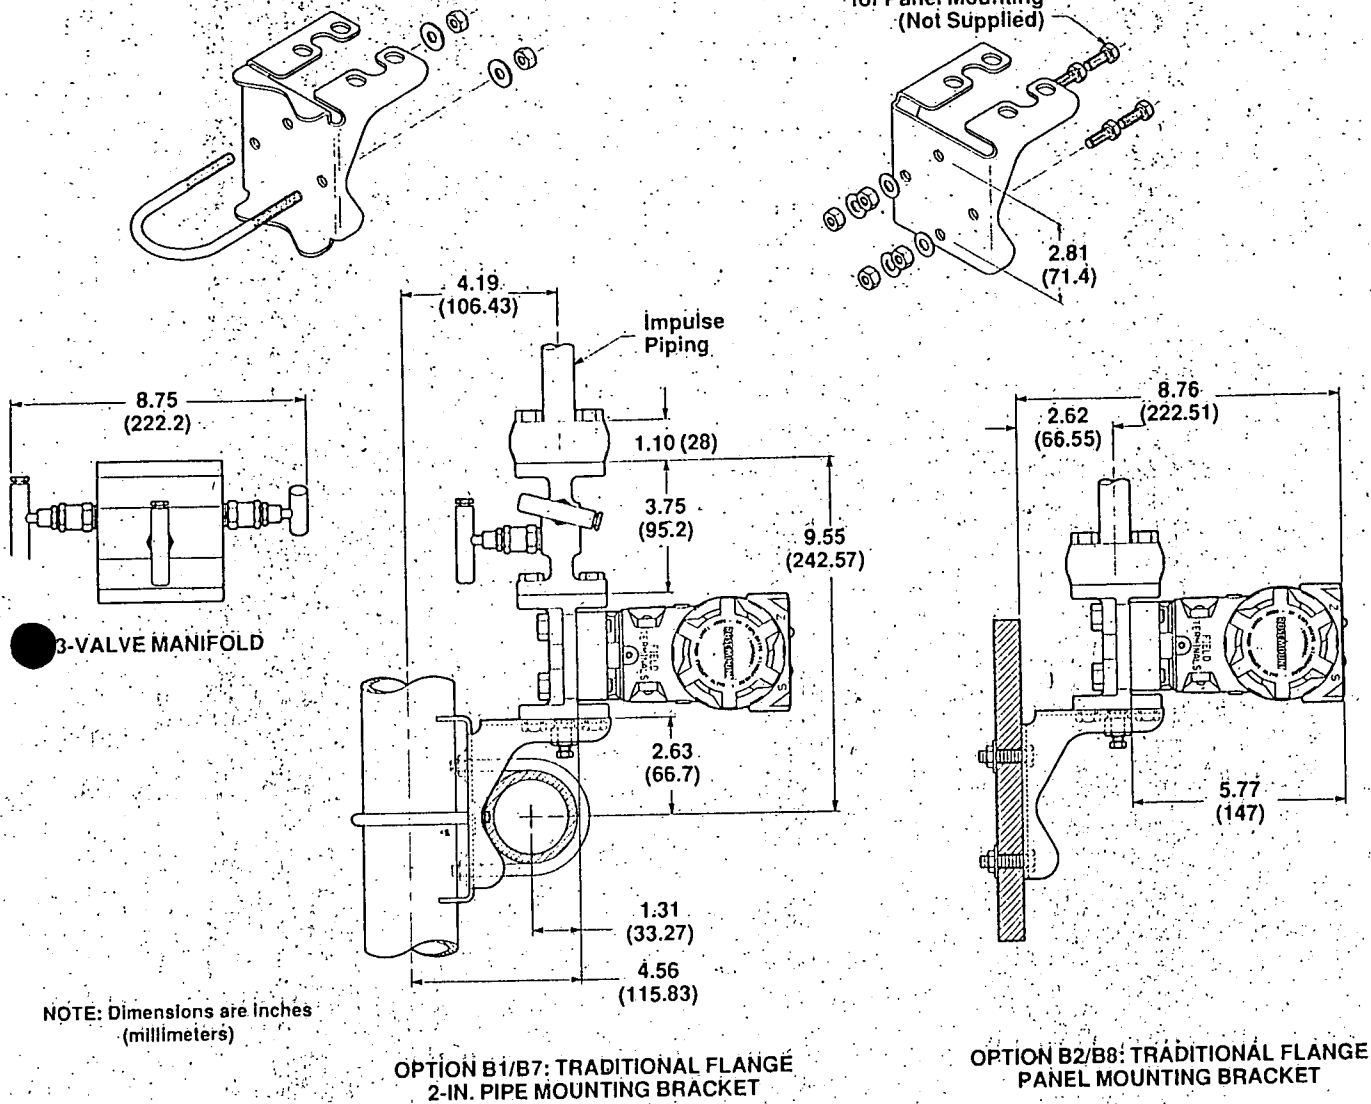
Optional Mounting Brackets for Traditional Flange Options H2, H3, H4, and H7
